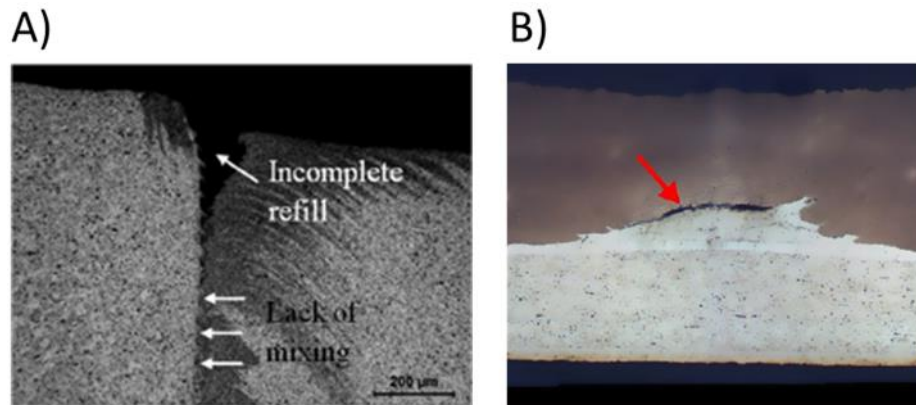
A) Incomplete refill and B) discontinuity at the centre of the weld.
